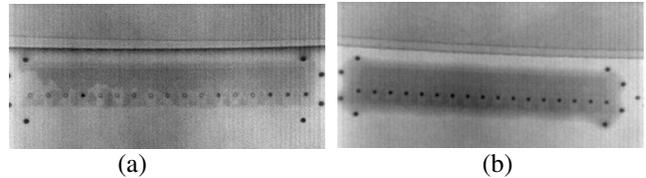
X-ray images on assembled die from laser saw process. (a) Solder voids (white spots) are apparent from initial laser saw process. (b) No solder voids are seen from final laser saw process.
